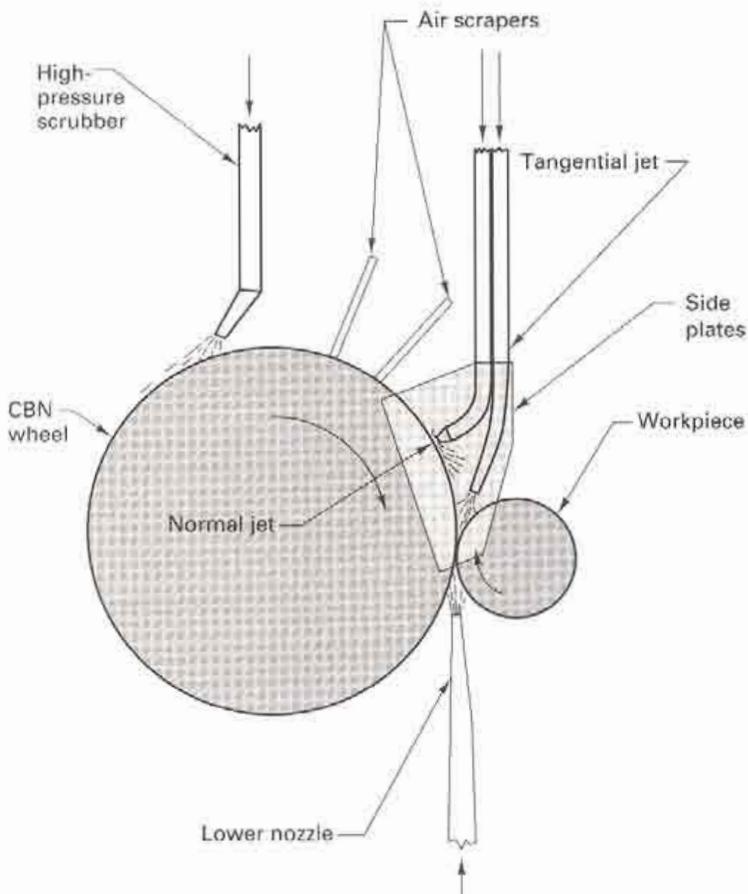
Coolant delivery system for optimum CBN grinding. (Source: "Production Grinding with CBN," M. P. Hitchiner, CBN Grinding Systems Manager, Universal Beck, Romulus, MI, Machining Technology, Vol. 2, No. 2, 1991.)
